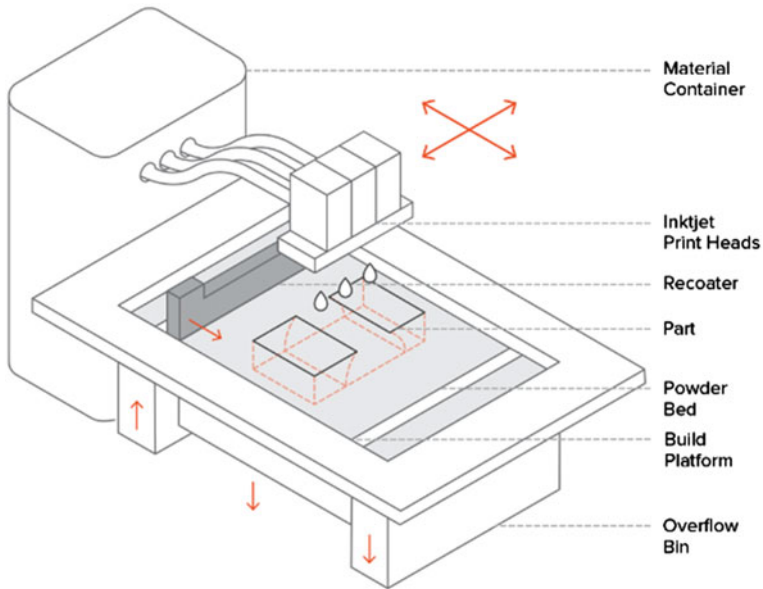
Schematic of a binder jetting machine (3D Hubs Inc 2022)
